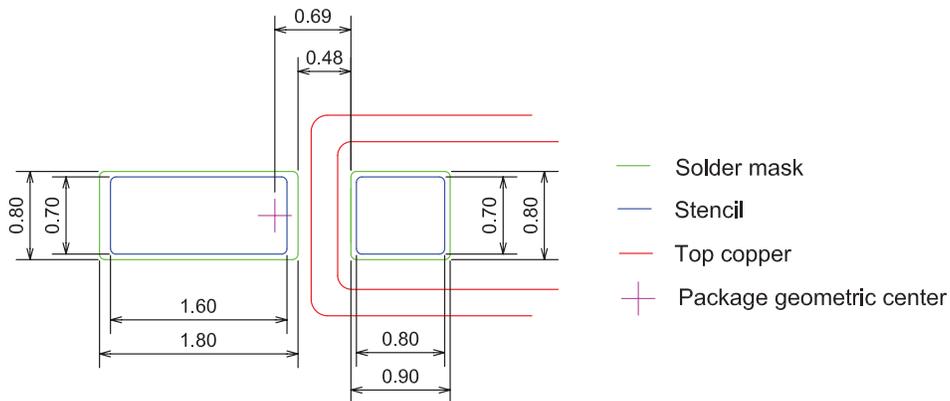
Recommended PCB solder pad layout for LUXEON 3014.
